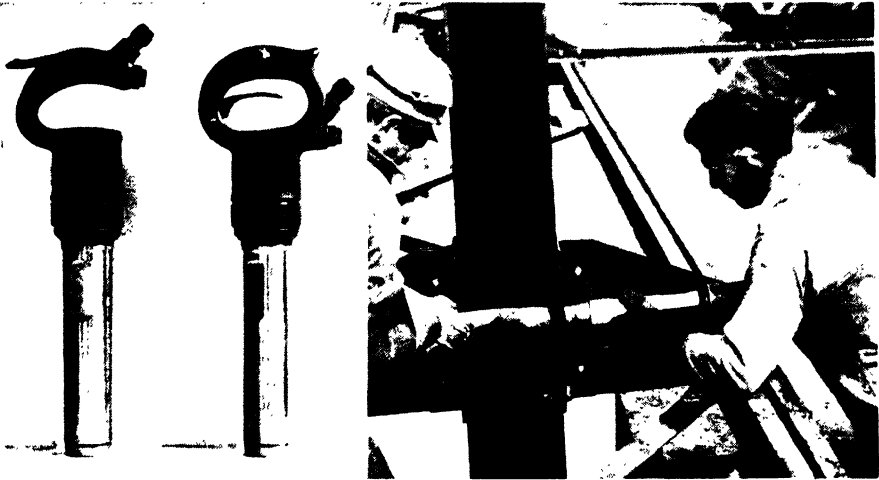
Showing exterior and interior trigger handles and the use of the gun.
